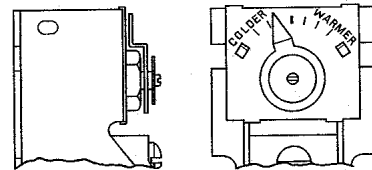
Drawing showing screwdriver slot range adjustment with stops.
